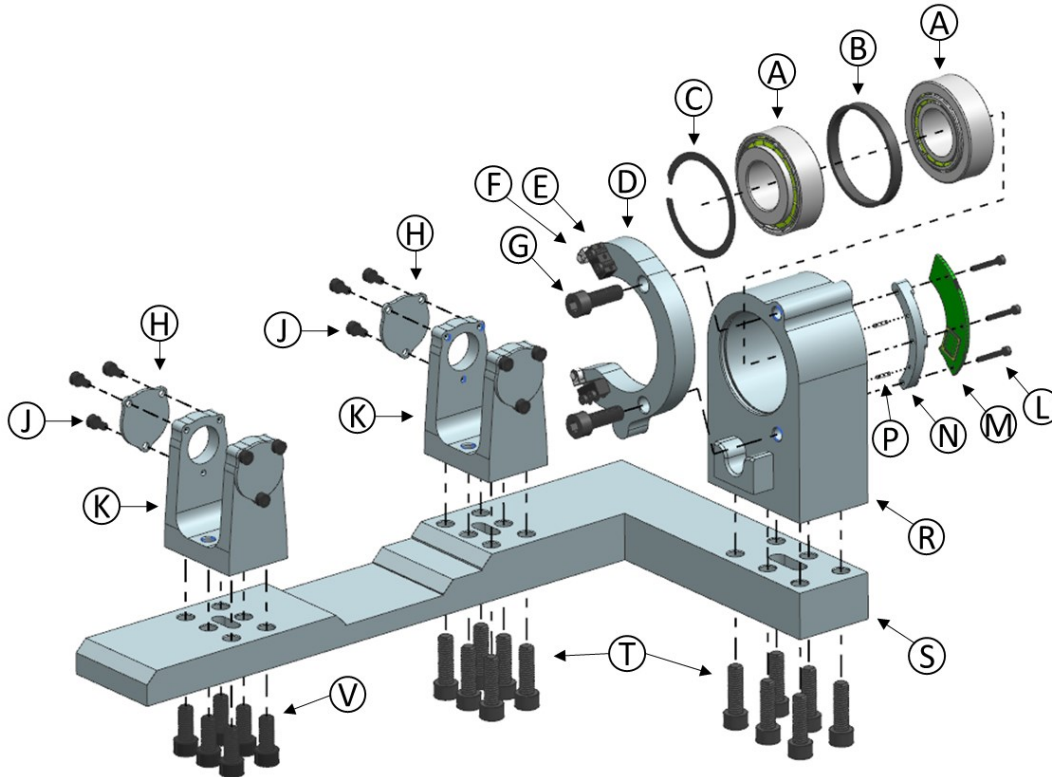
Exploded view of the foot assembly (foot plate hidden).
